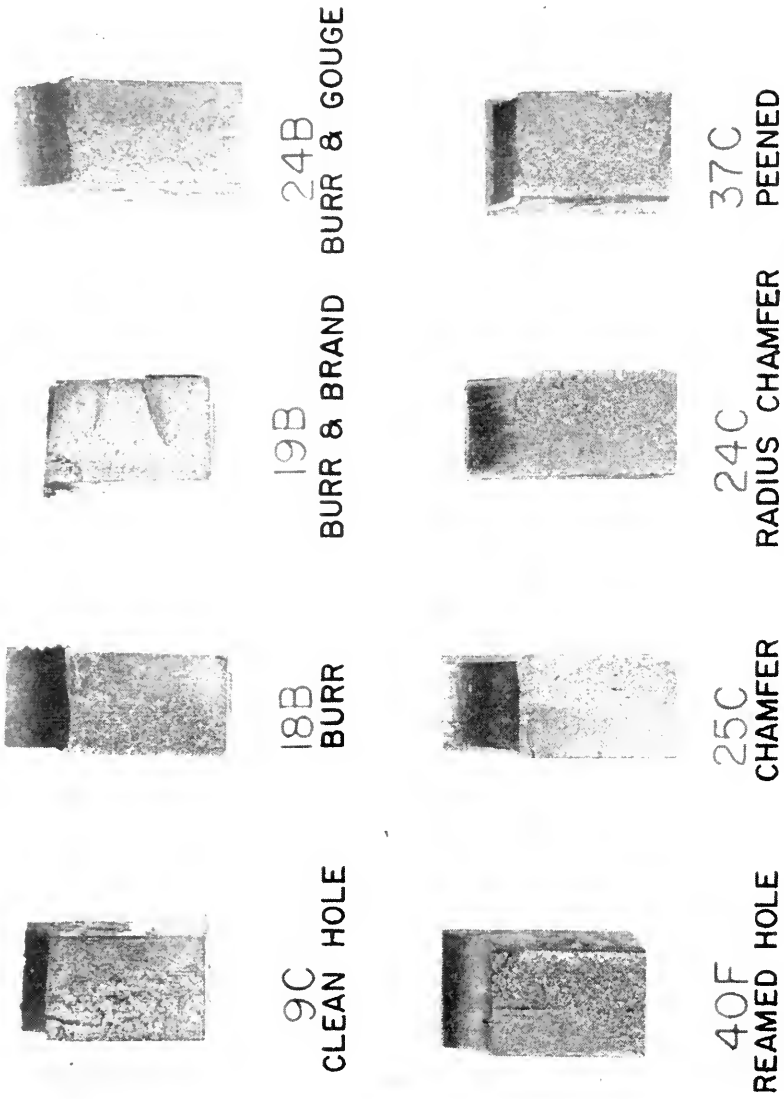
Typical fatigue failures produced with Sonntag universal fatigue testing machine.
